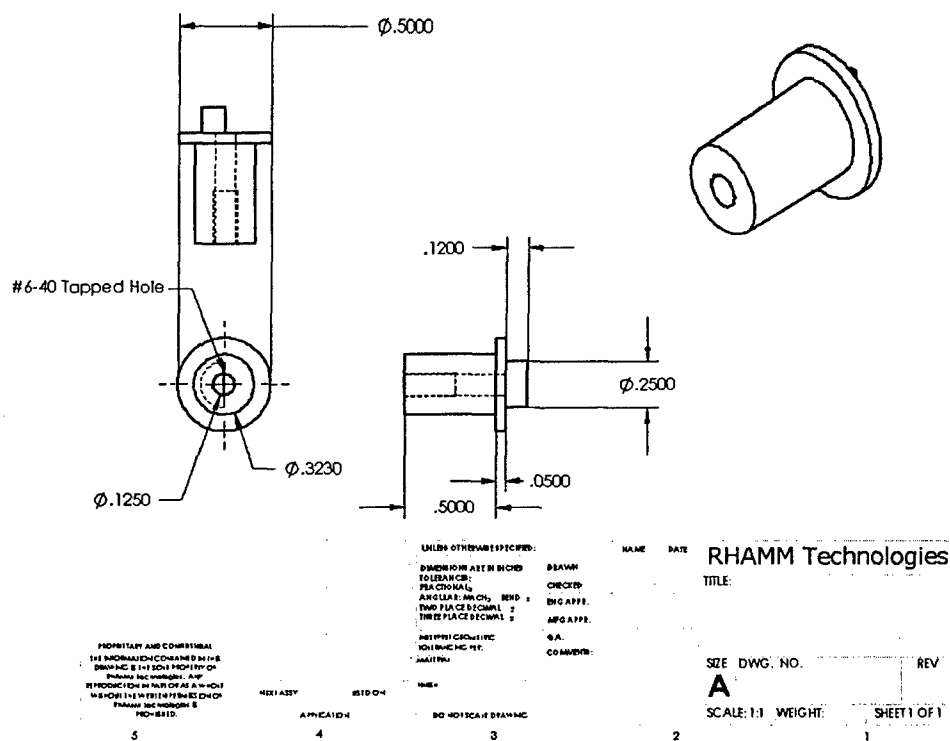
Drawing for DCB High Rate Experimental Apparatus: Plug.
